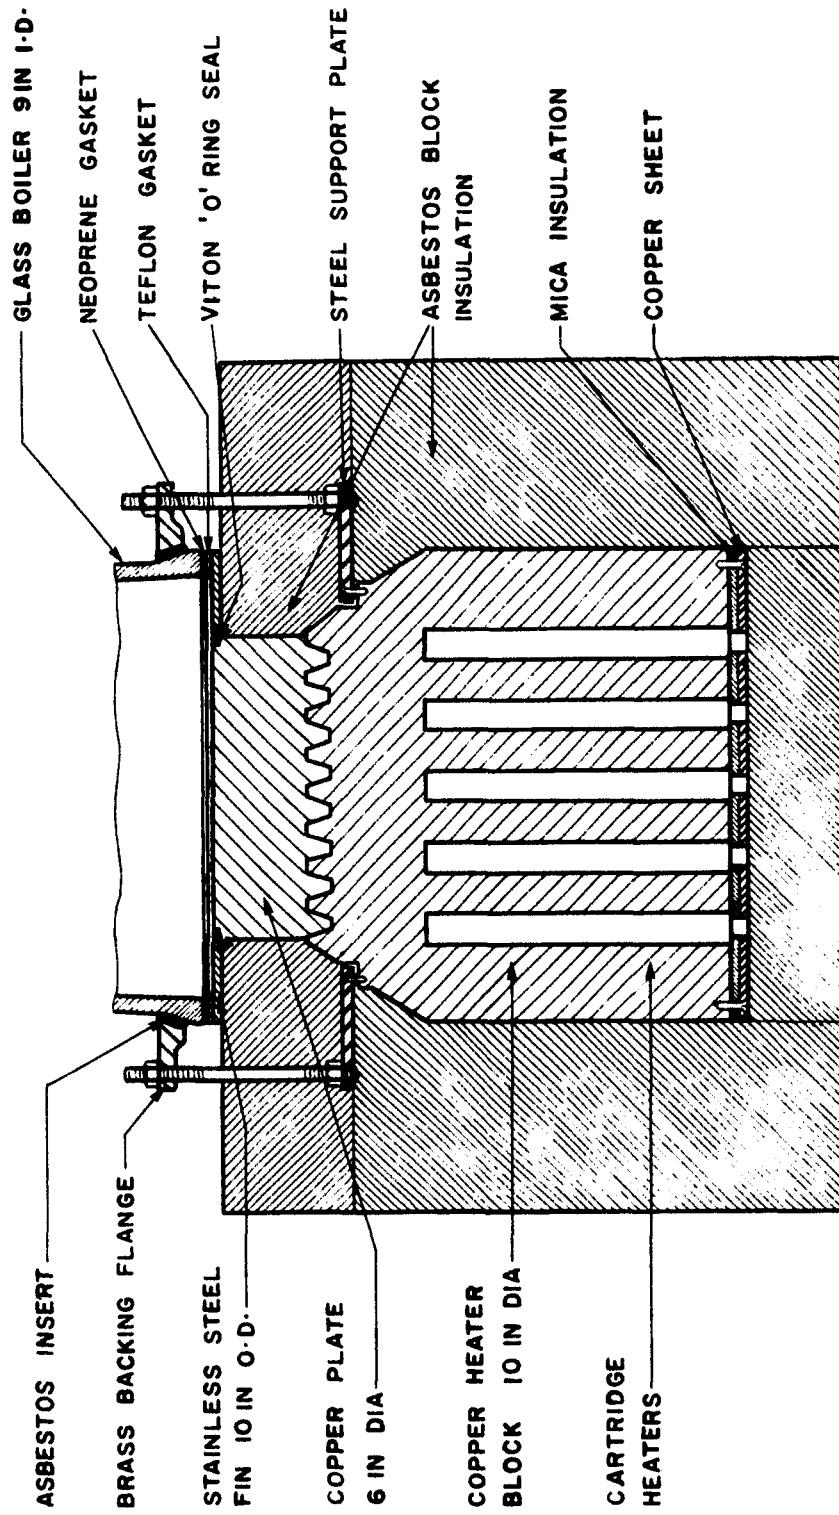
DETAILS OF THE HEATER UNIT AND HEAT TRANSFER SURFACE
